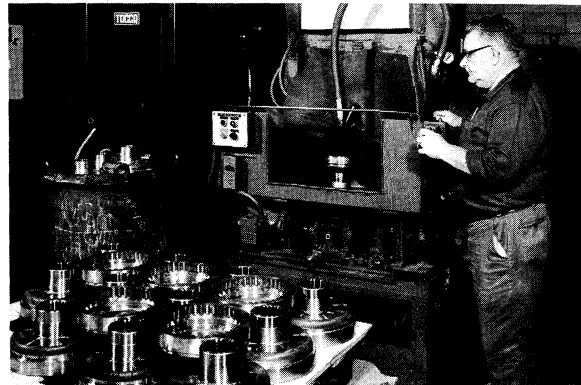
A setup for induction-hardening the internal spur gear teeth on a 1045 steel wheel hub gear for a heavy-duty lift truck. *Courtesy Clark Equipment Co.
